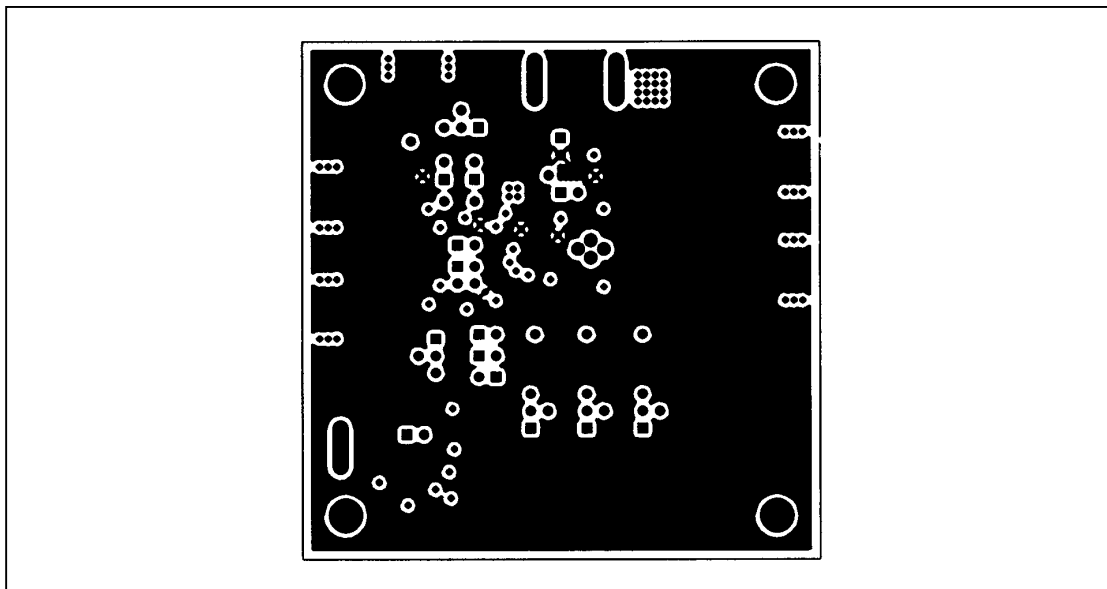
MAX3962 EV Kit PC Board Layout—Power Plane
